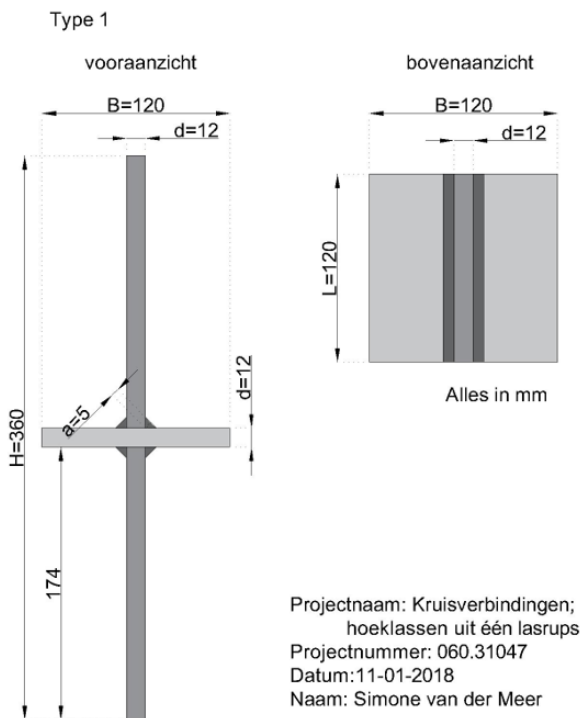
Dimensions of the 120 mm long cruciform joint specimen
